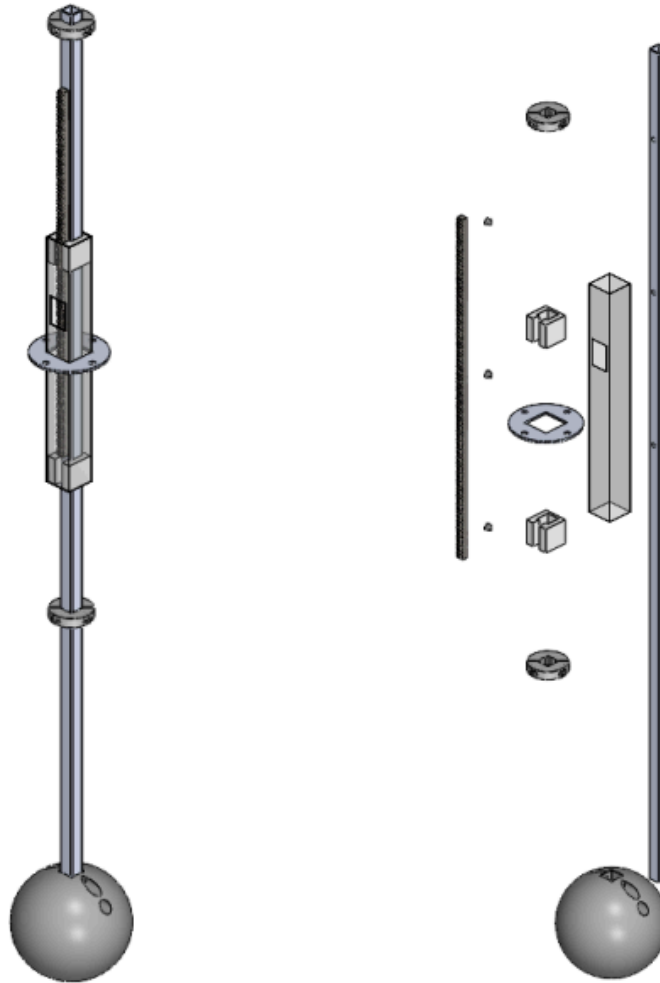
Picture of the full assembly in assembled and exploded views. The shaft housing is transparent in the assembled view in order to demonstrate the location of the linear bearings
